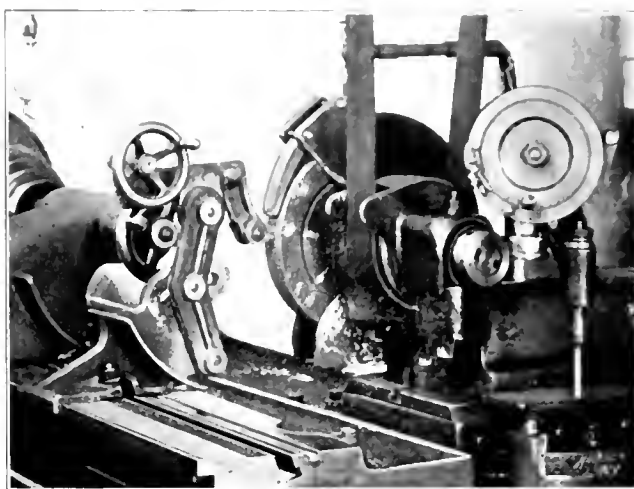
Fixture for Shaping a Concave Face in the Wheel for Crowning Pulleys
